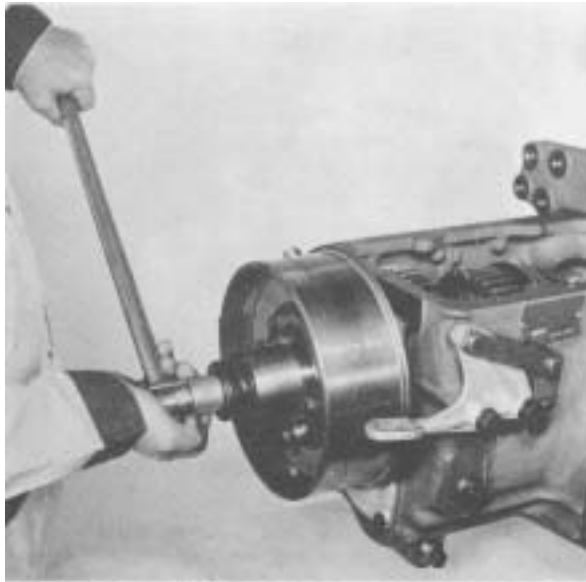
Install companion flange nut and tighten 400 to 500 ft. lbs. torque [542,3 - 610,0 N,m].
